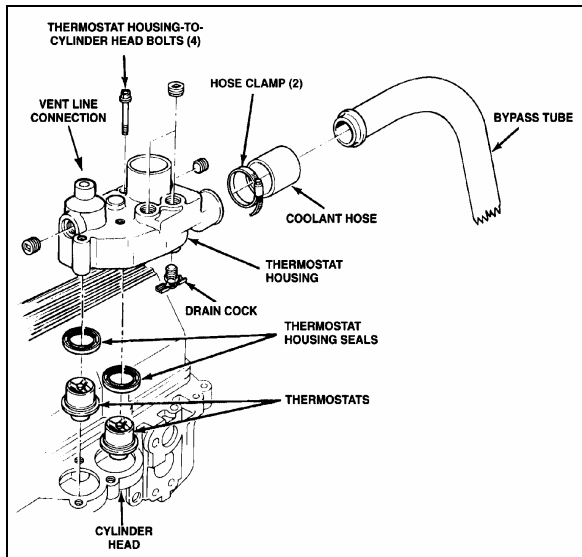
THERMOSTAT AND RELATED PARTS 05034
